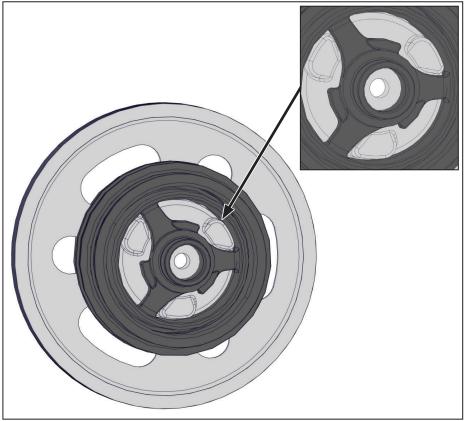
Engage VMAC crank pulley lugs on OEM pulley
